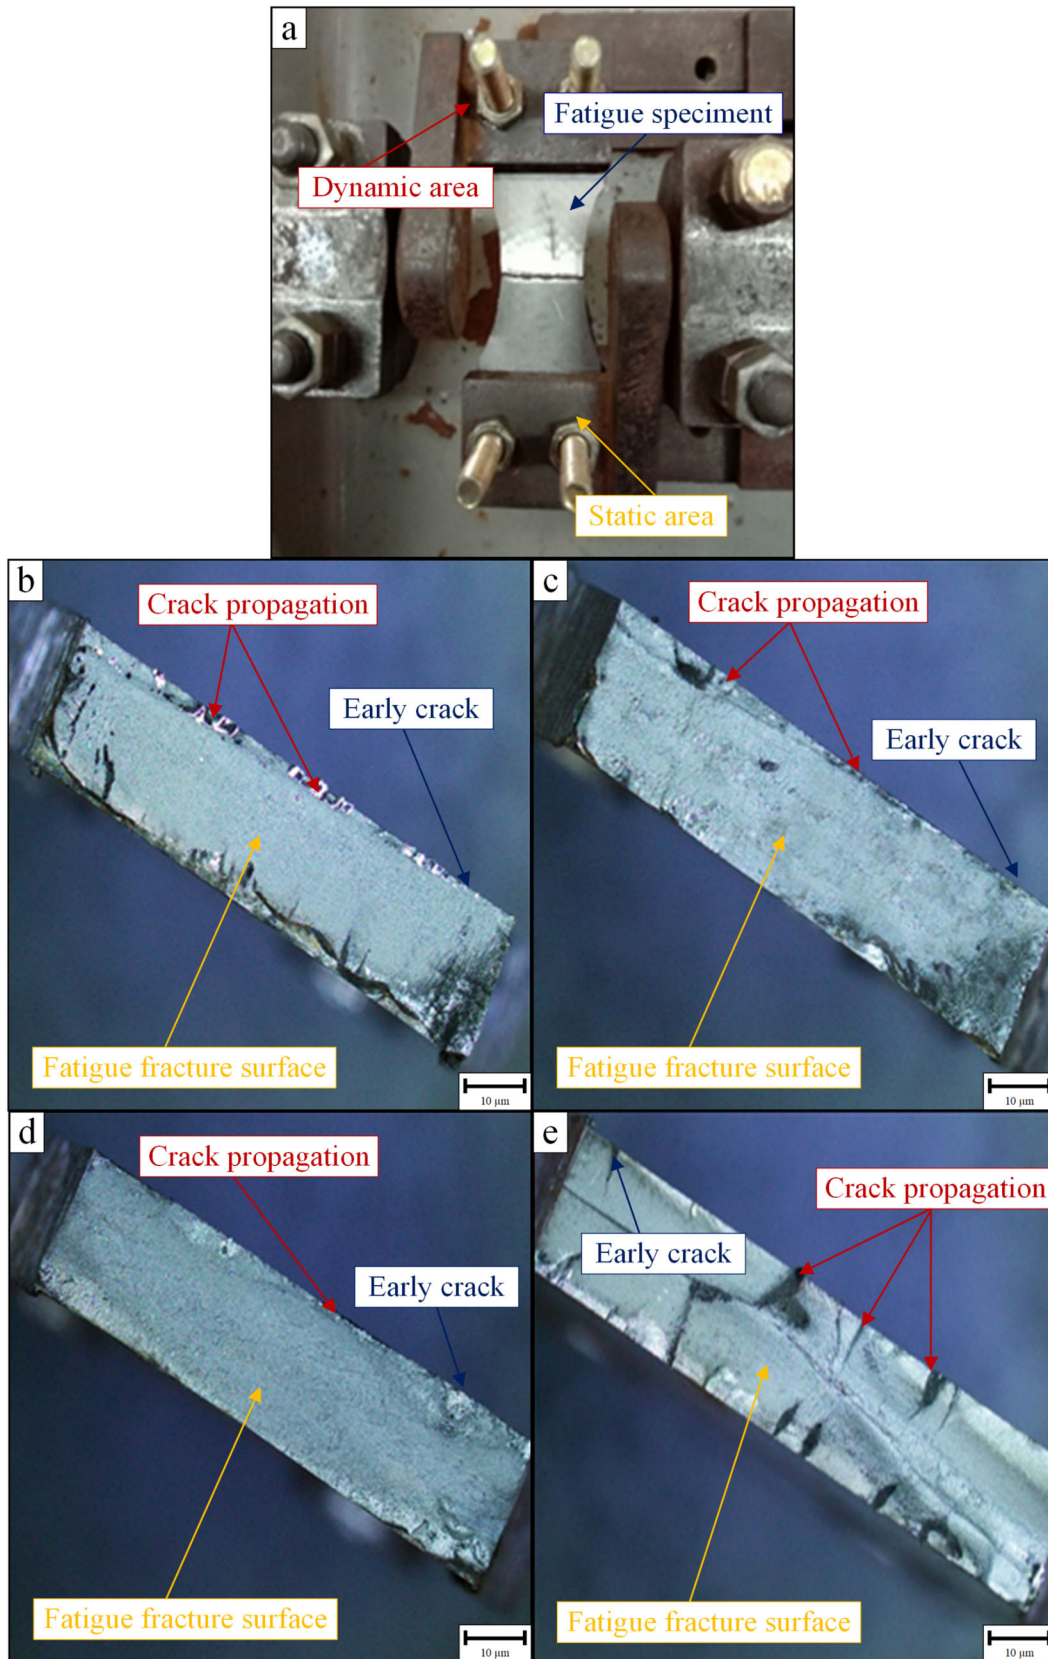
(a) Specimen conditions of fatigue weld joints before being observed under a microscope; Surface condition with angle loading of (b) 10°, (c) 11°, (d) 12° and (e) 13°.
